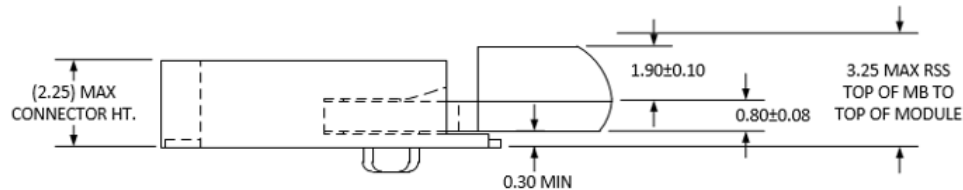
S5- Stack-up Top Mount Single-sided Add-in Card for 2.00 Maximum Top-side Component Height and with Higher Clearance above Motherboard
